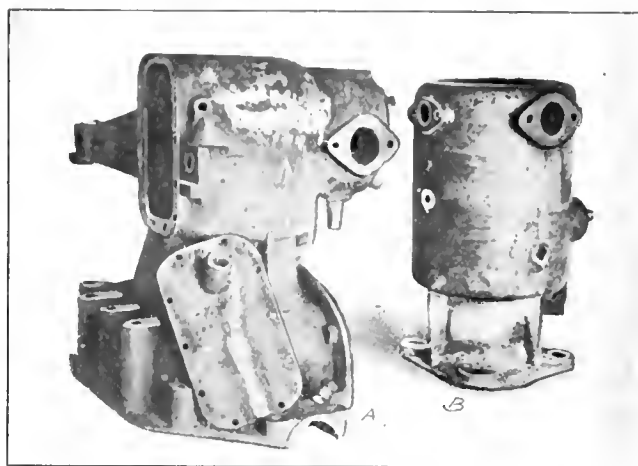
Cylinder A, (Fig. 1, B) repaired by inserting a Steel Piece, bent to Shape, and autogenously welded in Place.
